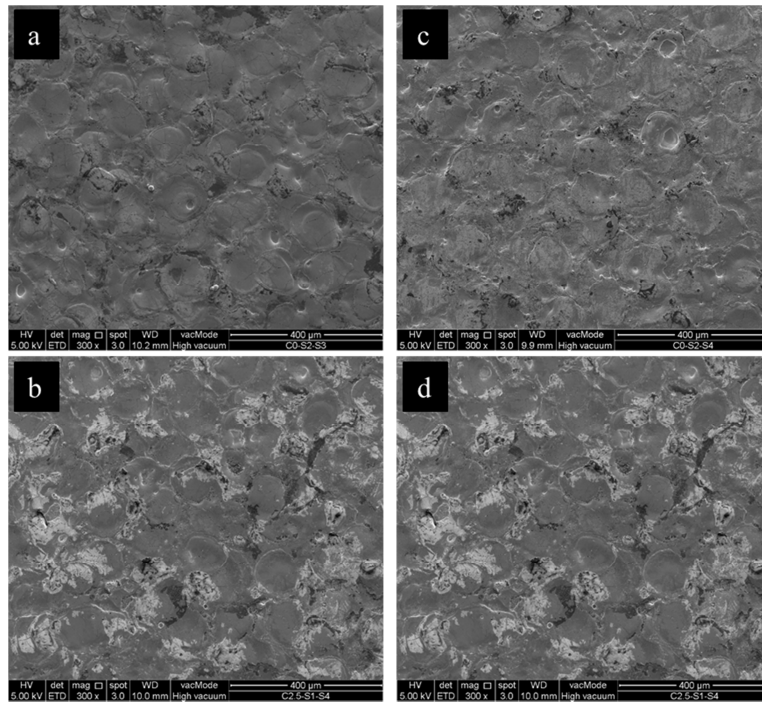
Surfaces machined with electrical discharge milling in (a) oil and (b) 2.5g/l graphite-mixed oil dielectric; and electrical discharge sinking in (c) oil and (d) 2.5g/l graphite-mixed oil dielectric
